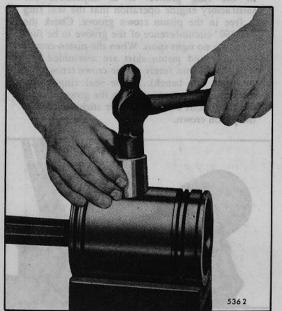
Installing Piston Pin Retainer using Tool J 23762
